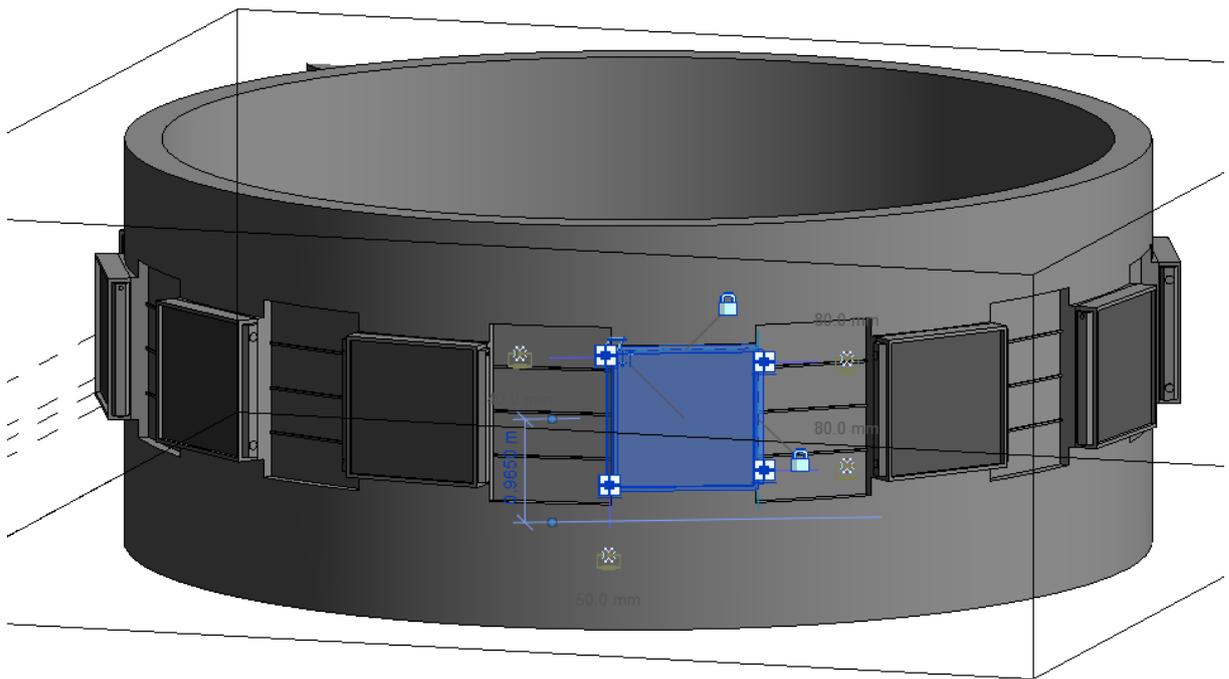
Assembly of the cooler on the sides of the stator frame.
